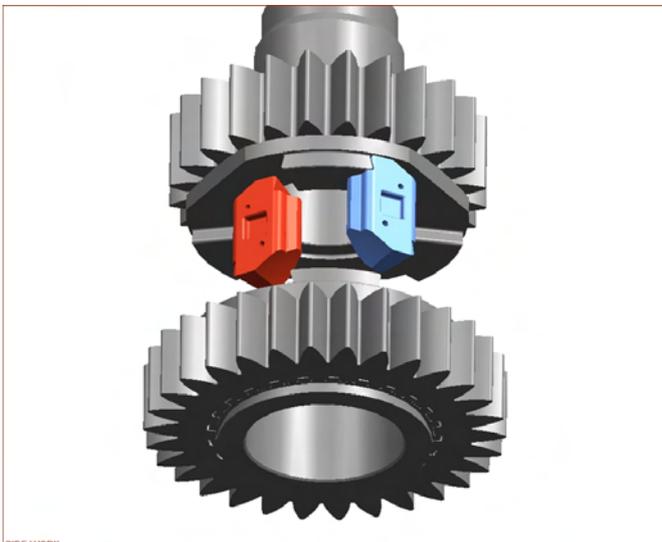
Actuate first ring to take up drive in 1<sup>st</sup> gear.
